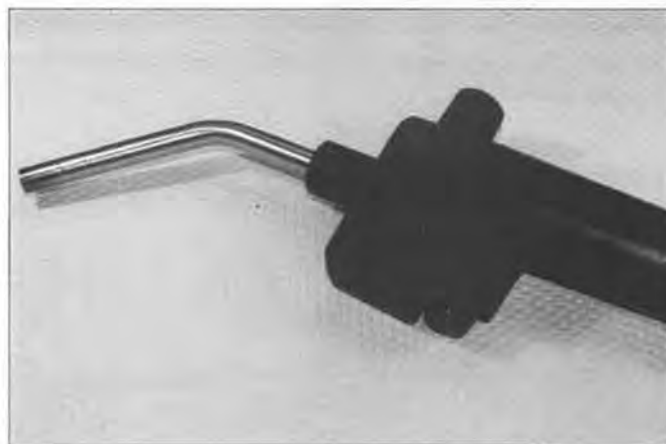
Hand-held propane torch that I use. It screws onto the 14-ounce propane container.
